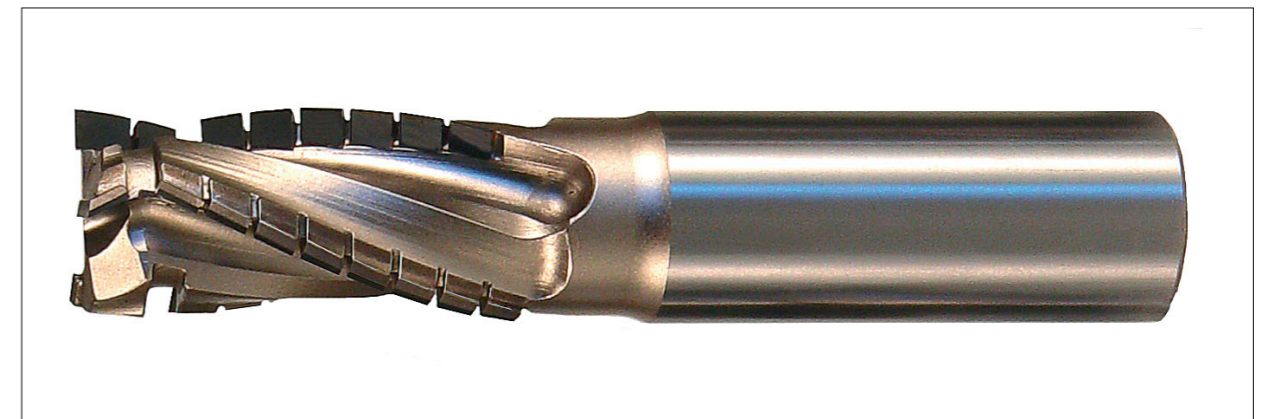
Quality feature: Helical cutting edge sequence and helical chip gullets on a DP (PCD) Z3 router cutter
